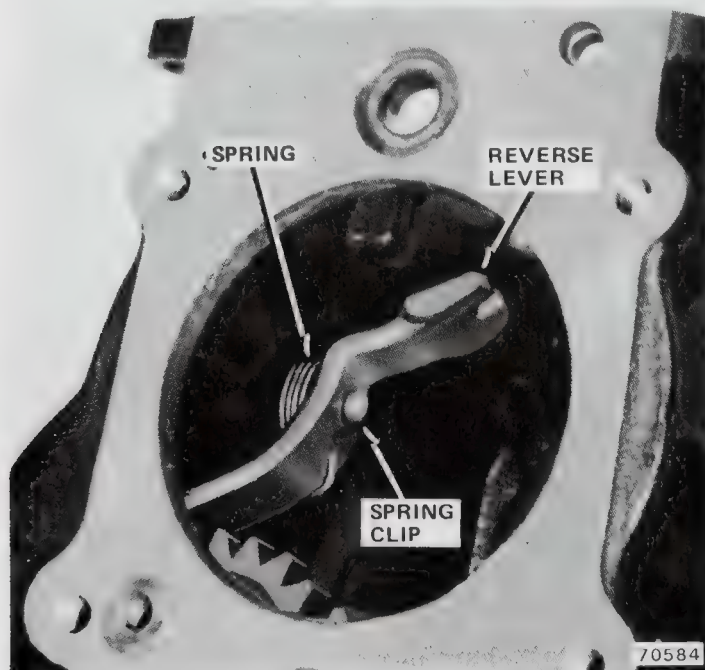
B-56 Reverse Lever, Spring Clip, and Spring Position
